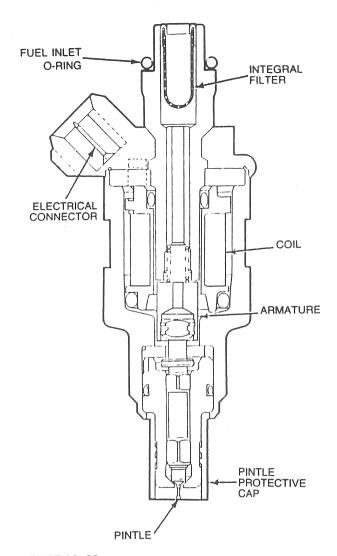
Injector solenoid. (Courtesy of Ford Motor Co.)
